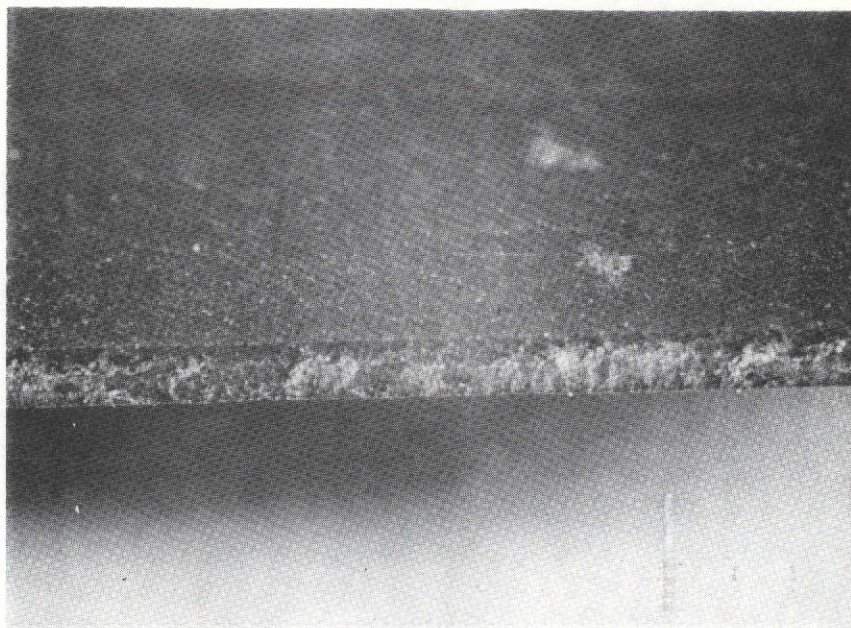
Type B Positive Plate - Uncoined Die-Cut Edge
